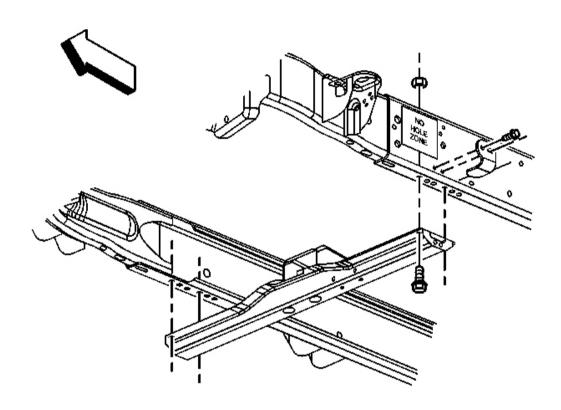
Identifying Crossmember & Bolts Courtesy of GENERAL MOTORS CORP.
